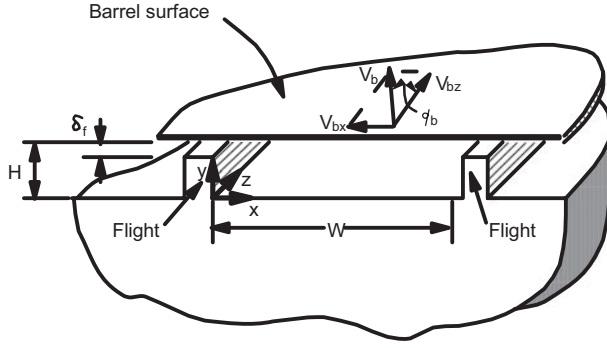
Parallel plate model of flow in the metering section of a single-screw extruder. The axes are attached to the rotating screw, which makes the barrel appear to move relative to the screw.
